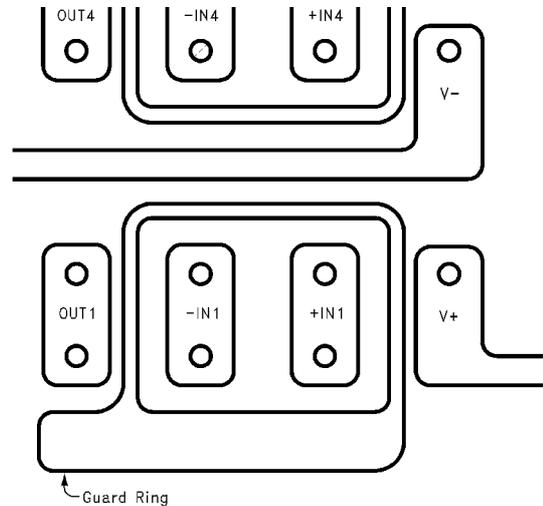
Example of Guard Ring in P.C. Board Layout
